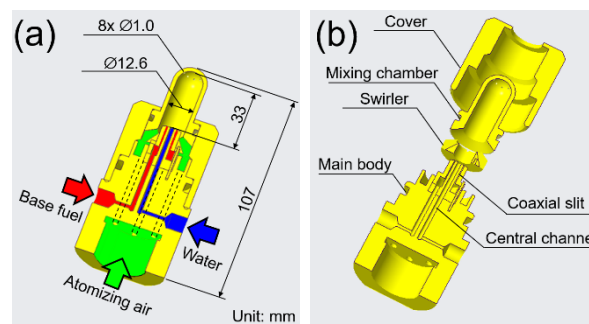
(a) Cross-sectional and (b) exploded-view schematics of proposed fuel-water RIM injector
